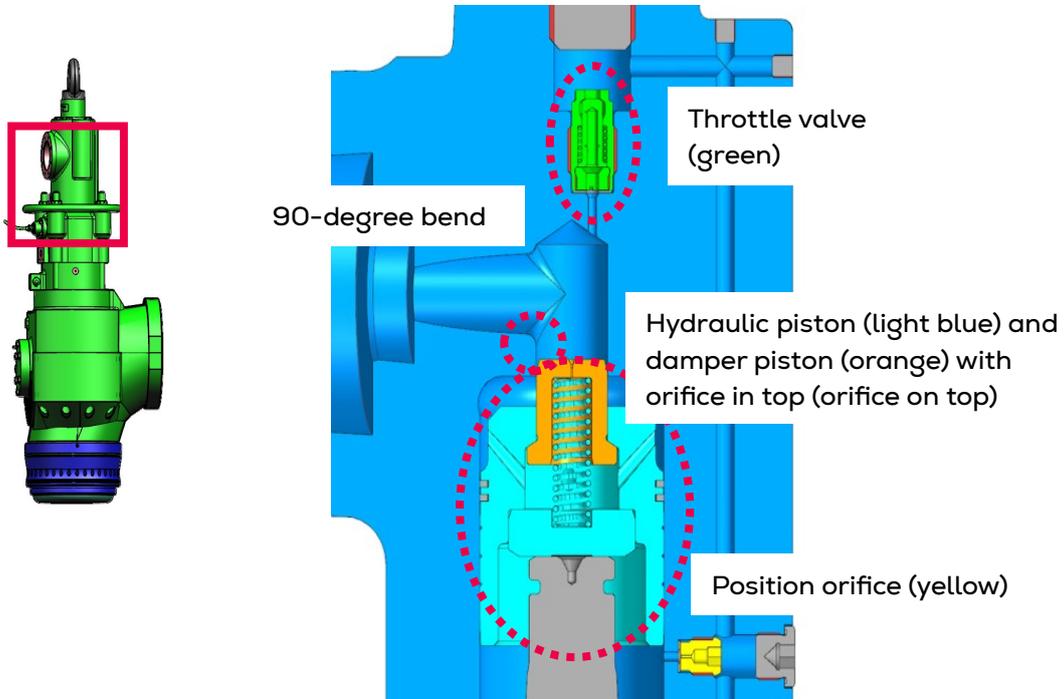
Critical components to inspect: 90-degree bend, throttle valve, hydraulic piston, orifice on top of damper piston, and position orifice
